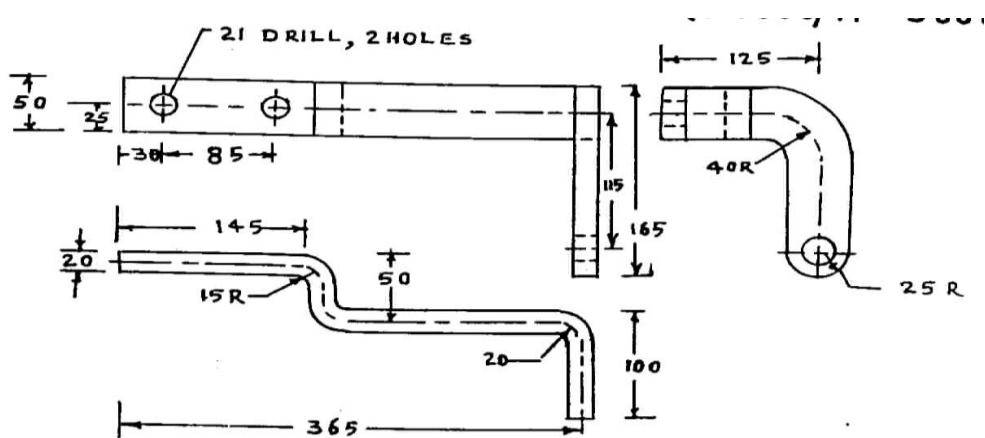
(c) SWITCH EXTENSION PIECE FOR BG S 6062 & 63/M
